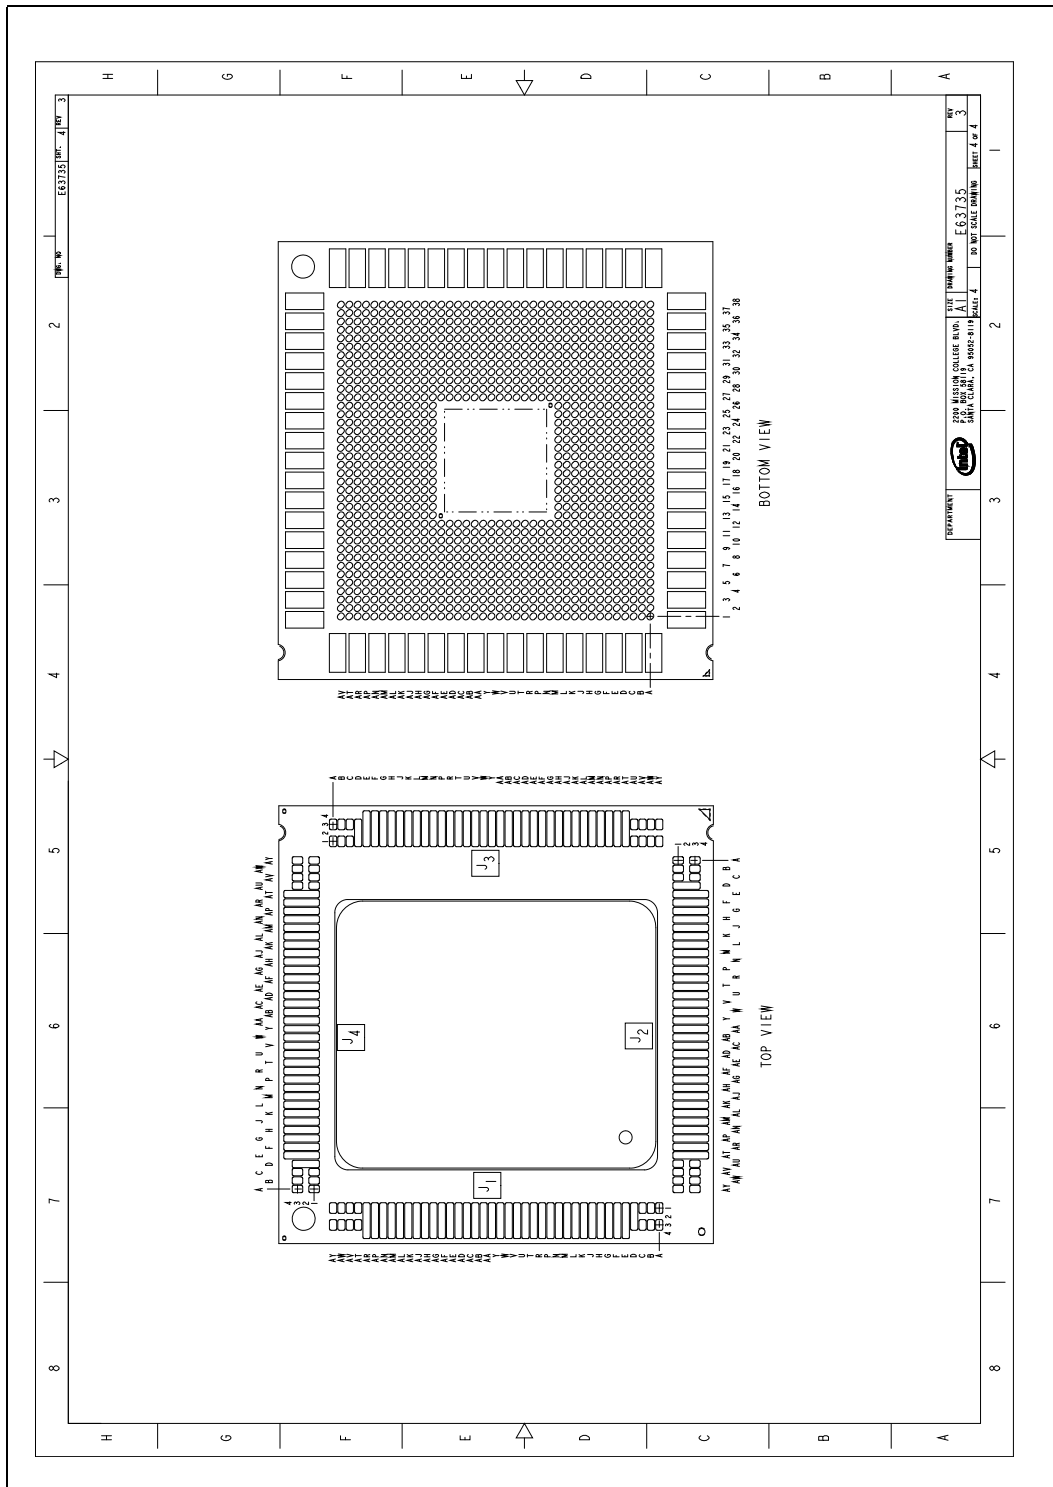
Intel® Itanium® Processor 9500 Series Package Drawing (Sheet 4 of 4)
